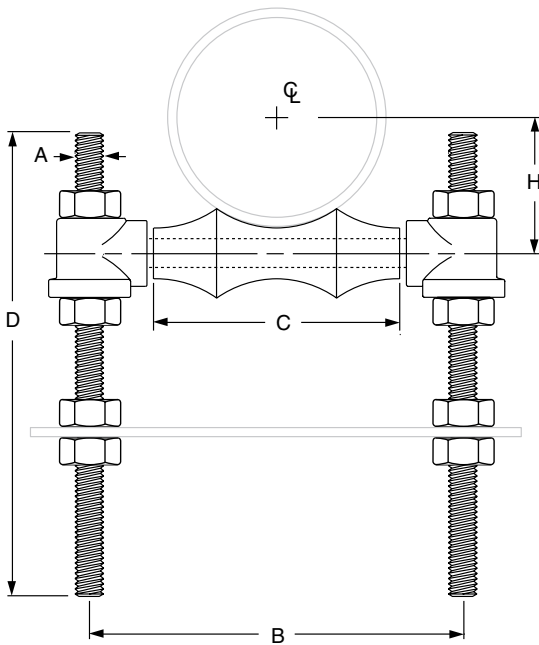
WEIGHT (LBS) • DIMENSIONS (IN)
